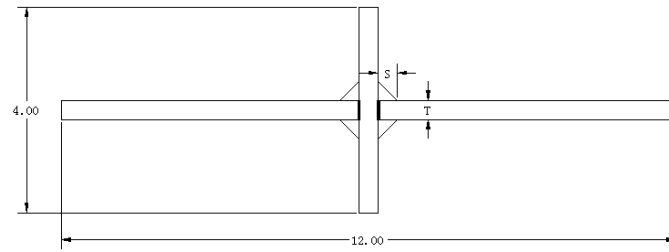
Dimensions of a Cruciform Joint, Weld size (S) and Thickness (T)
